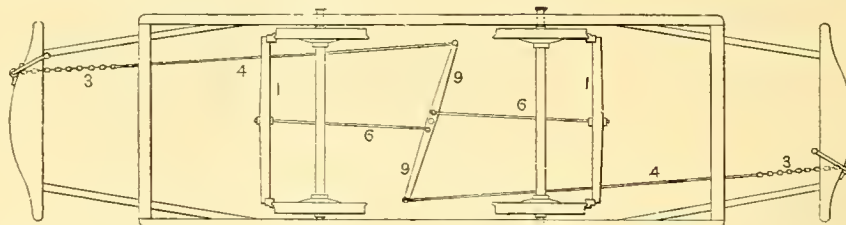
TYLER BRAKE FOR STREET CARS. Plan.
